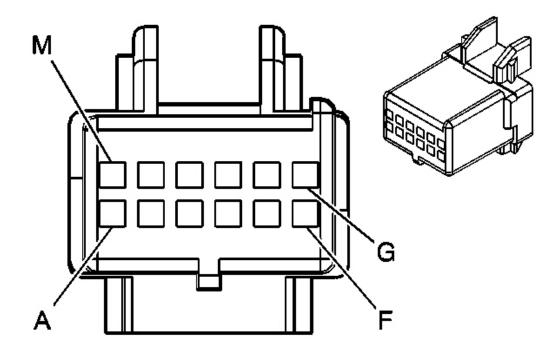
HVAC Control Module C2 Connector End View Courtesy of GENERAL MOTORS CORP.
